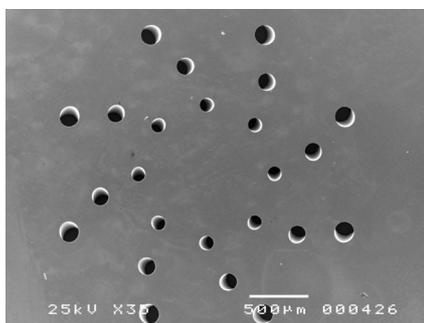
High aspect ratio laser drilling of a stainless steel fuel-injection nozzle.
